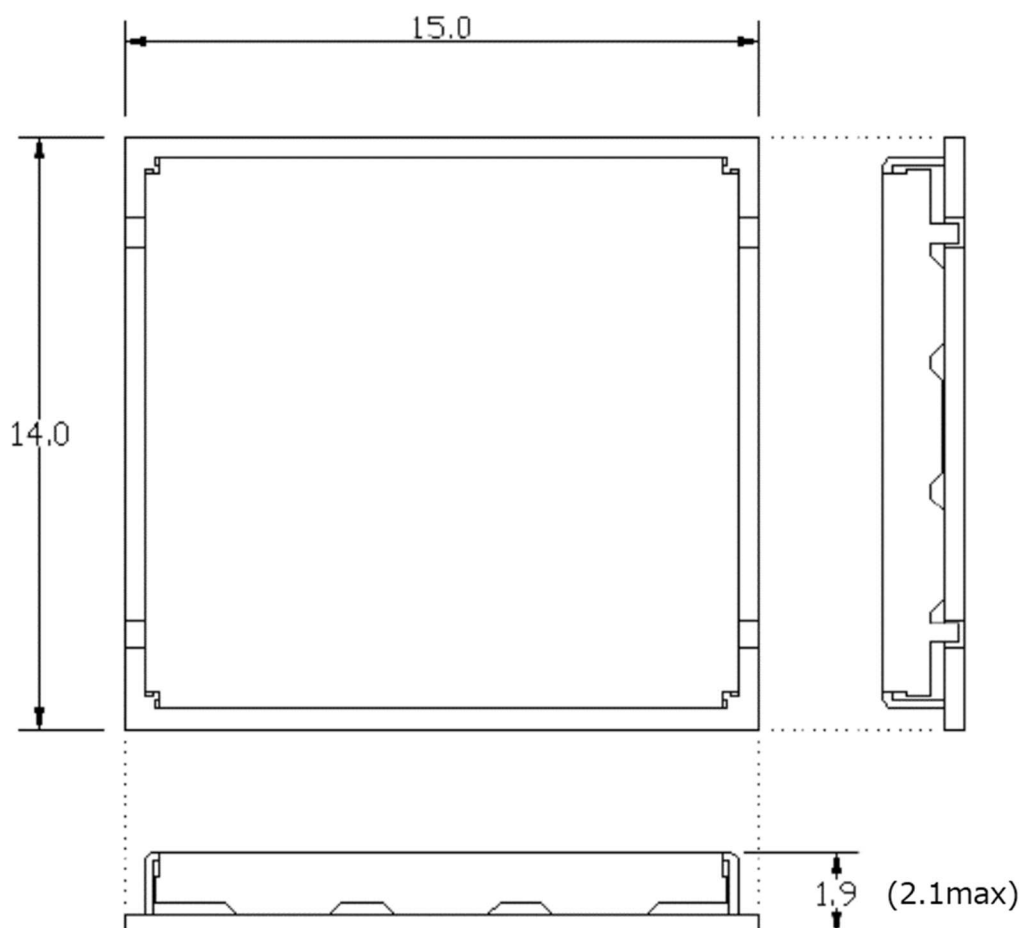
dimensions of the module (TOP VIEW) (unit: mm)
